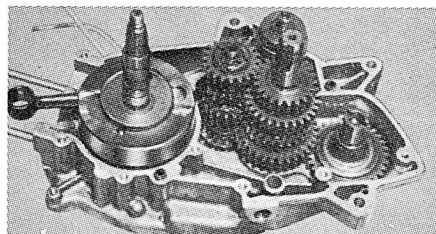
View of the right crankcase half with gears and shafts positioned.
